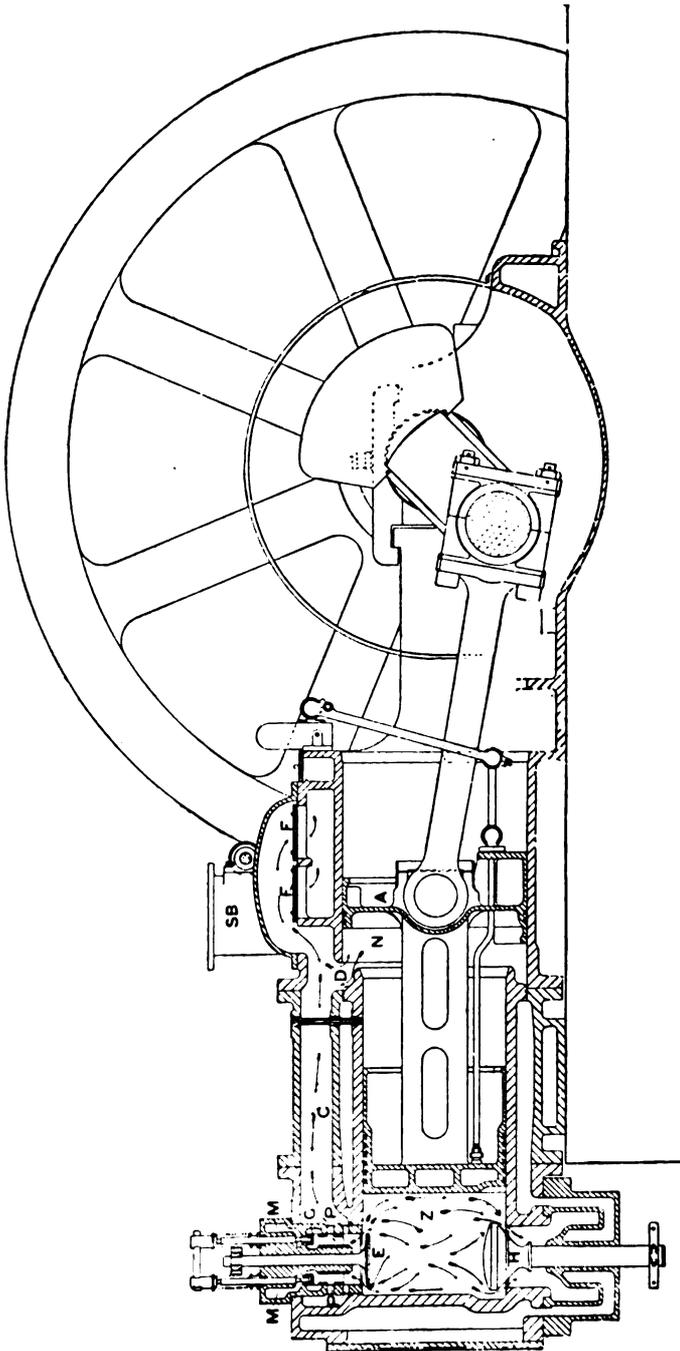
"Premier" positive scavenging Gas Engine.
